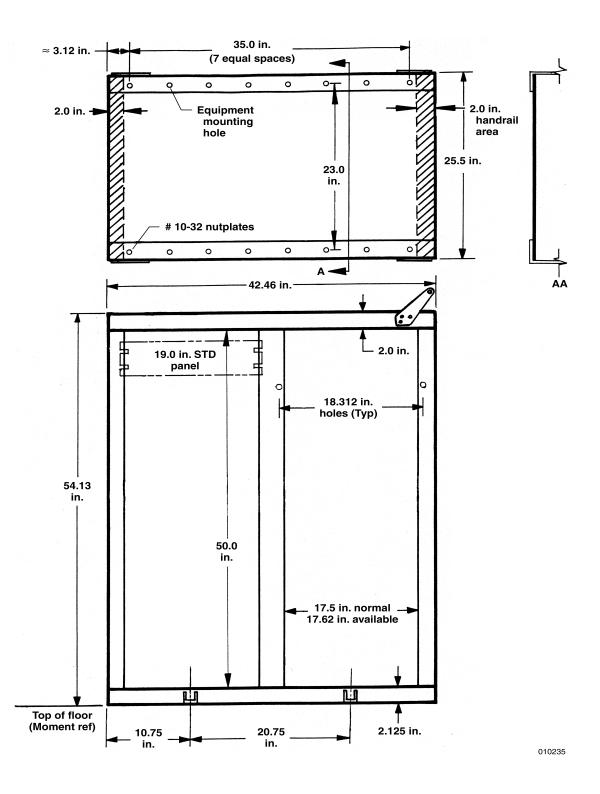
(b). Standard equipment racks – high rack – dimensions.
